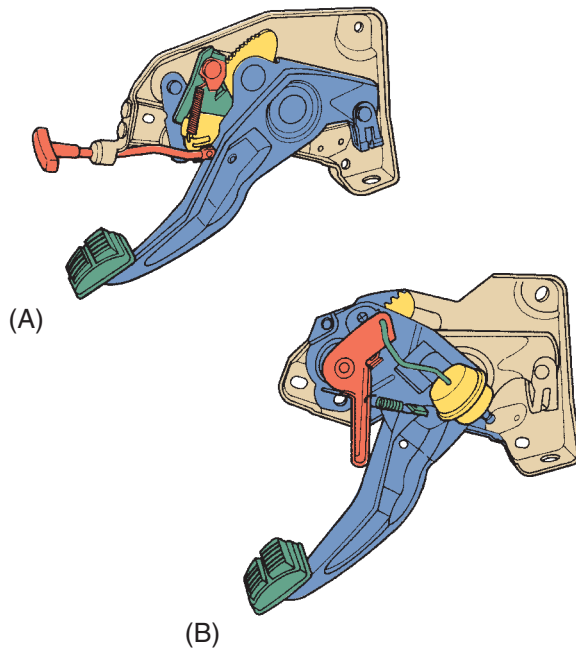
Typical pedal-operated parking brakes: (A) mechanical release and (B) vacuum release.
